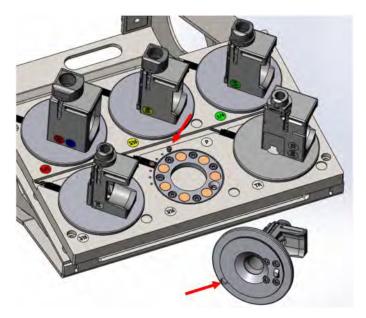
Vacuum nosepiece tool identification. Each nosepiece has a unique counterbore pattern which mates with a unique pin pattern on the rack (red arrows).
